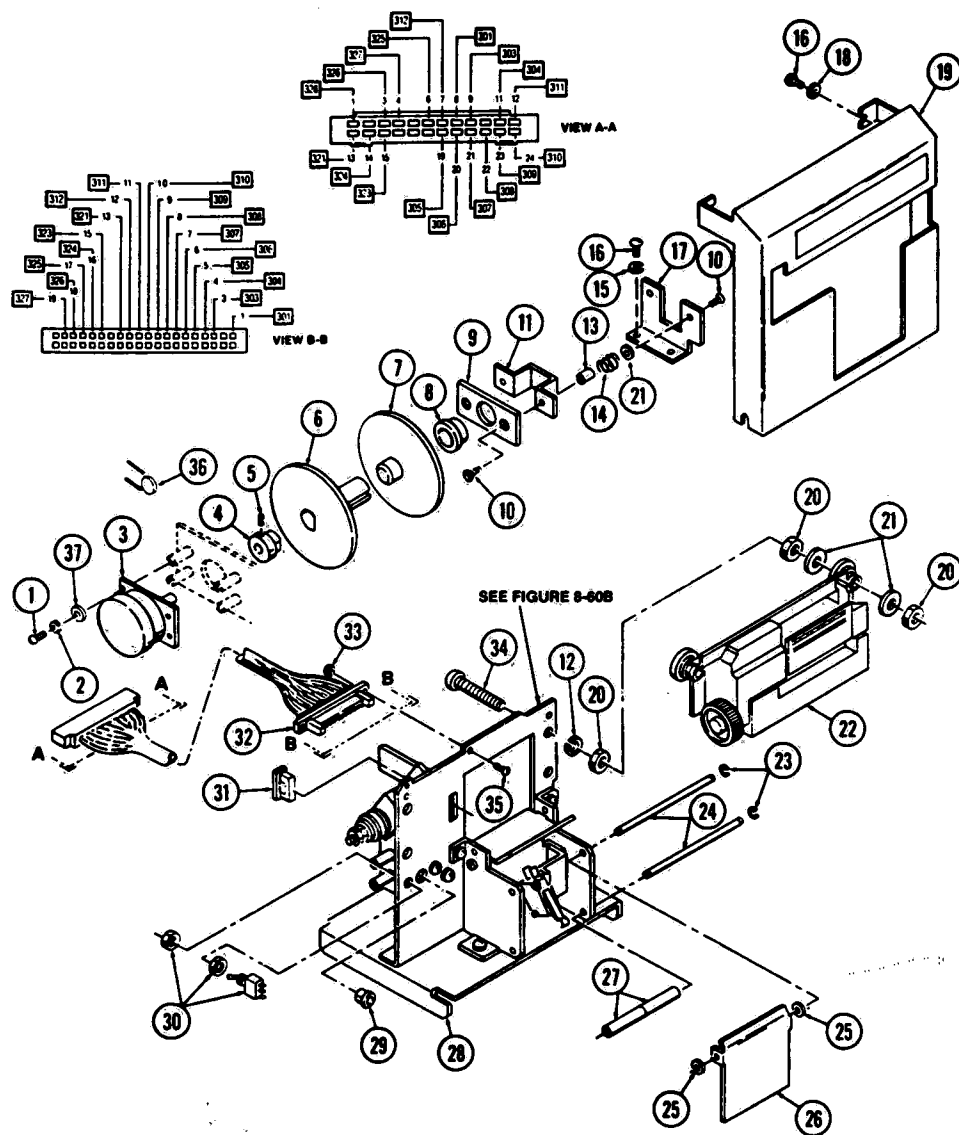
A. PRINTCON PRINTER ASSEMBLY, Units After 6/85
